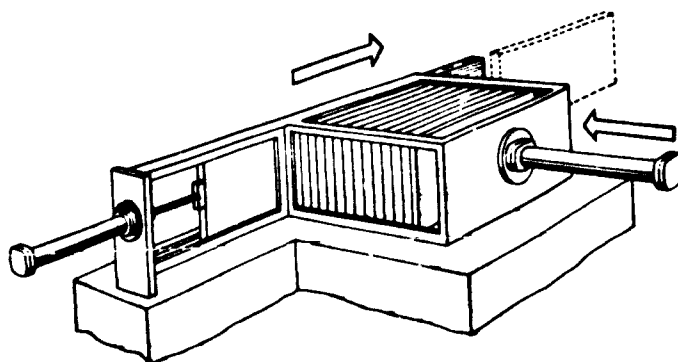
Adjustable hopper side feed onto machining bed and end-feed into machining position. Two pneumatic cylinders are used.
